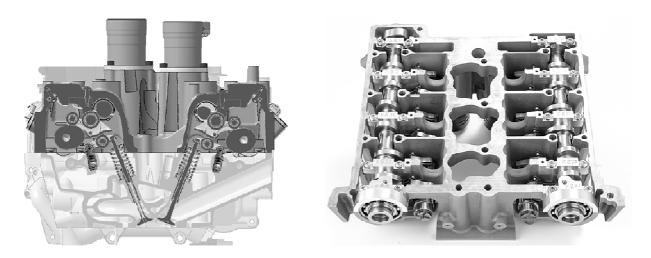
Structural Valve Cover (CAD Design with Cylinder Head and Hardware)
